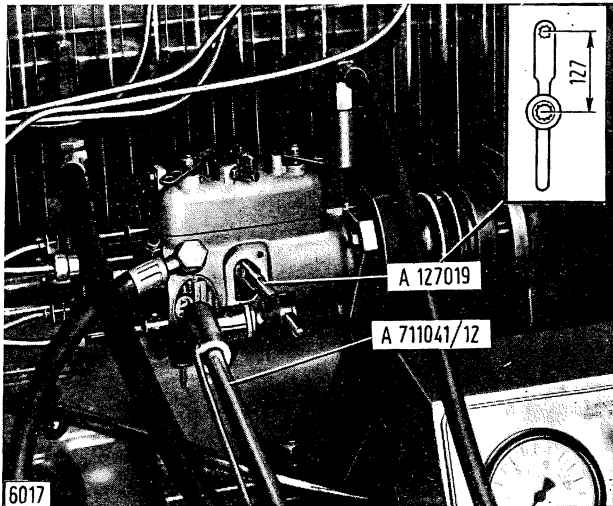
Torque tightening the splined drive plate bolts.
